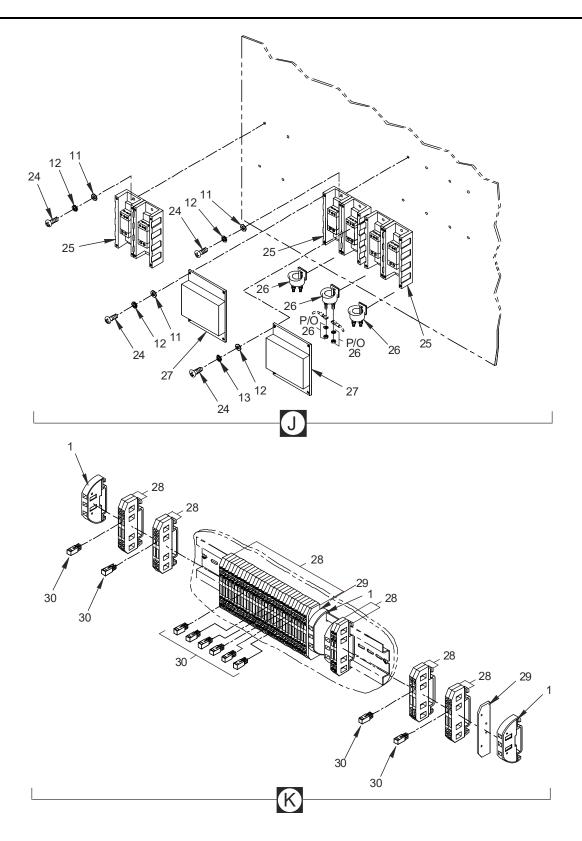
Barrier Panel Assembly (Sheet 6 of 7).
